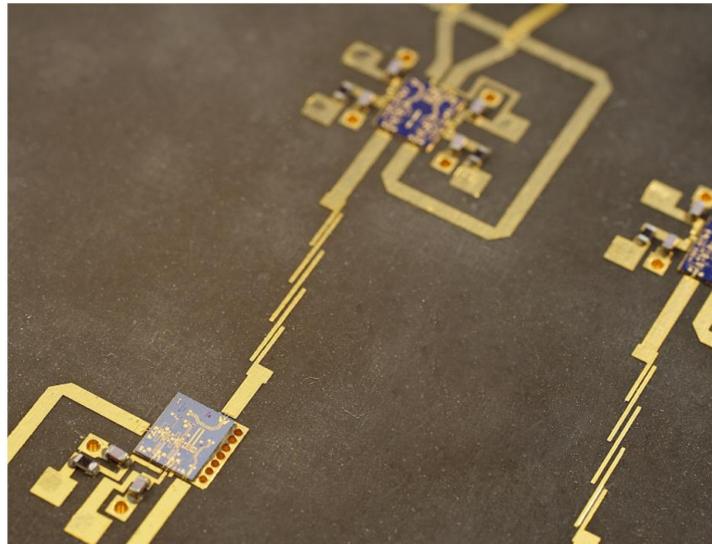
MMWave MCM with die mounted on the surface of a PCB
